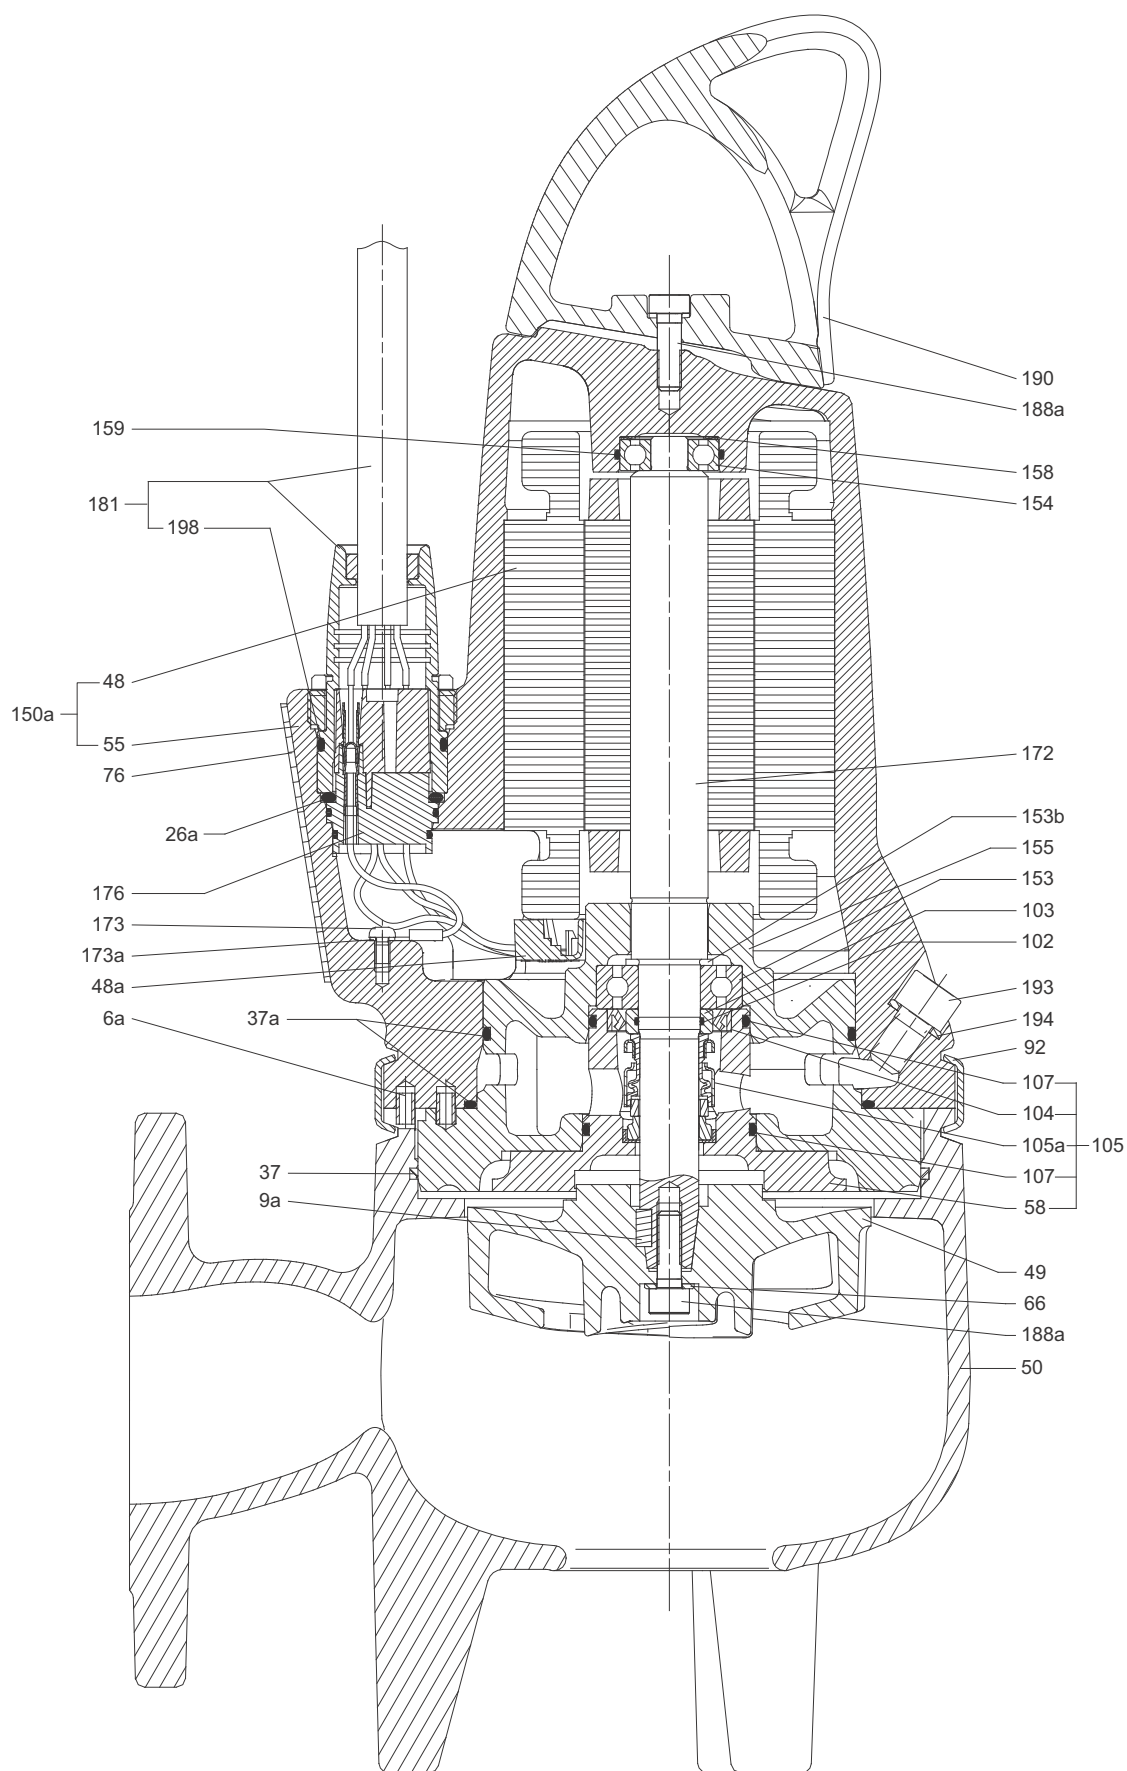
Sectional drawing, SLV.65.65.09/11/15
